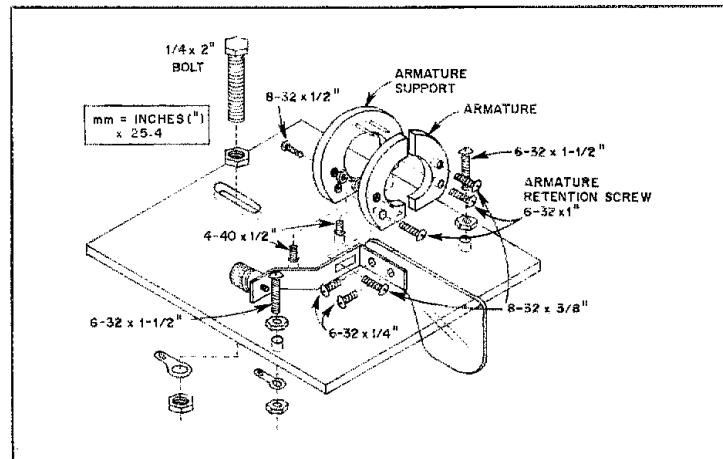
Drawings show the dimensions and shapes of the parts needed to build a CHIP.
